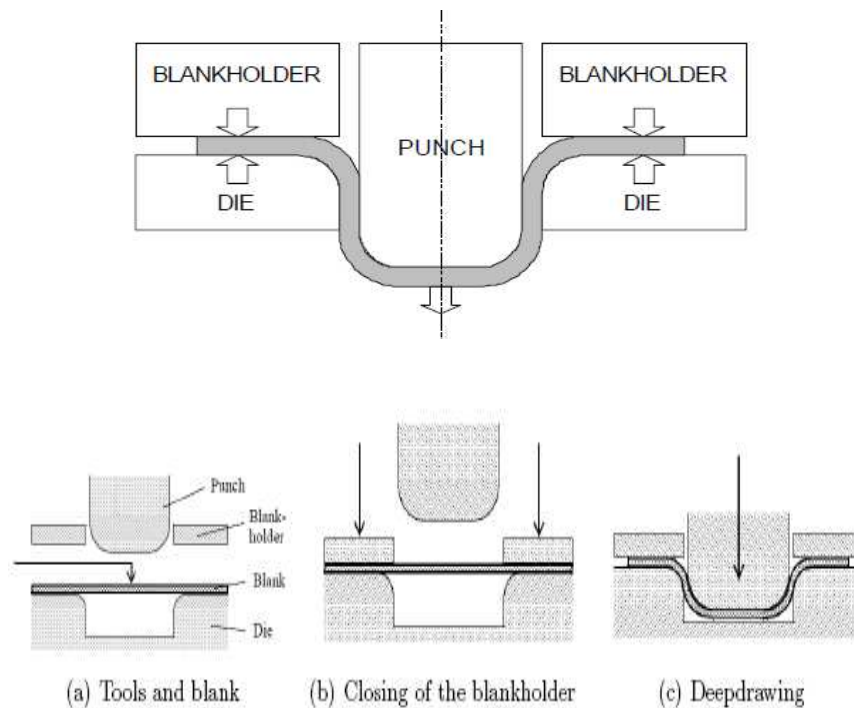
Schematic representation of the deep drawing operation, for a cylindrical tool.
